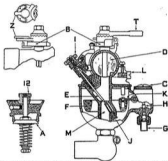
Schebler Carburetor, Showing Construction. Auxiliary Air Valve Section at Lower Left; High Speed Adjustment at Upper Left.
